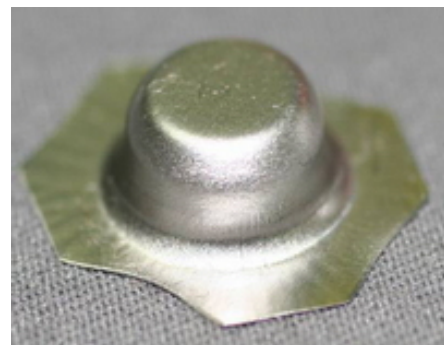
Deep drawing result from micro press system with blanking force adjustment unit
